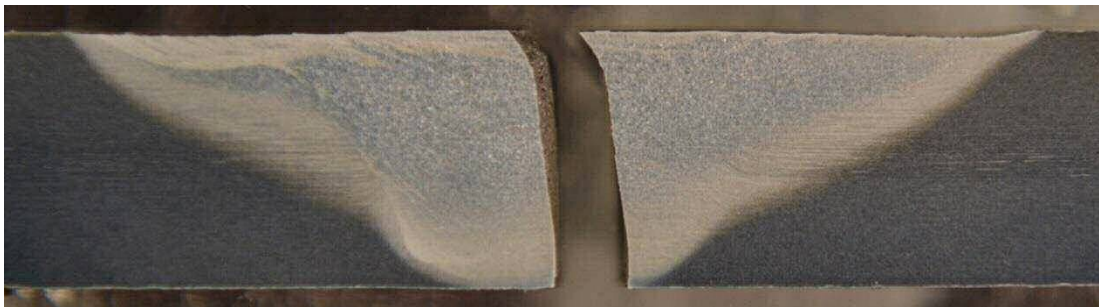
Macrograph of fast weld sample's fracture path (side view) [Etched]
